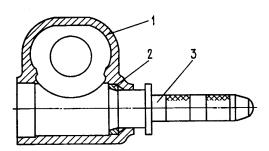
Removing Worm Upper Bearing Outer Race with Mandrel 67.7853.9541:
